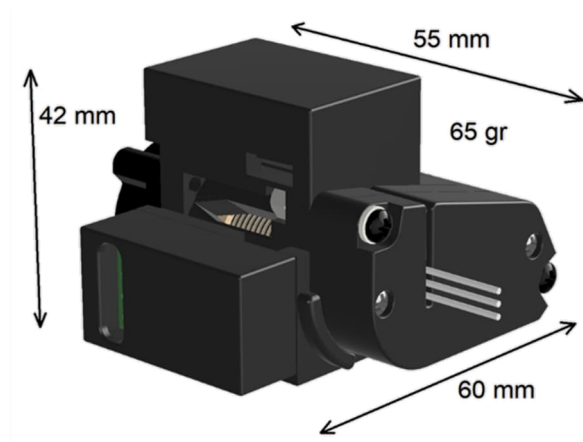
3D rendering showing the final assembly of the external PCR module. The arrows indicate the dimensions of the module.
